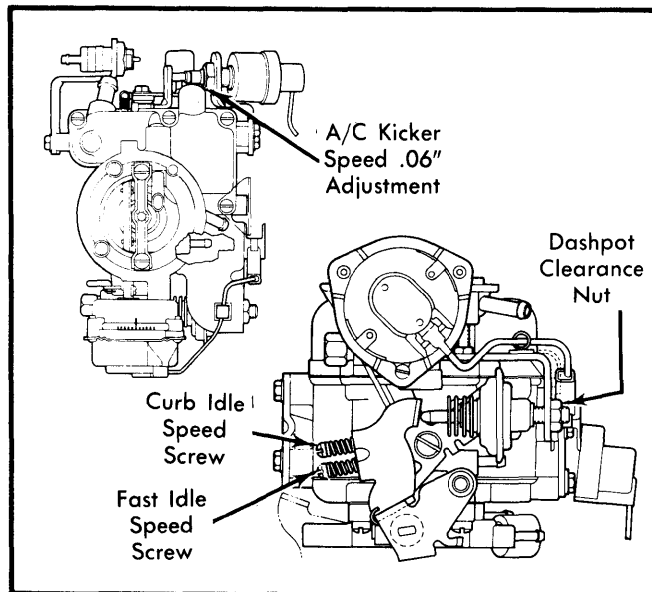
Adjusting YFA 1-Bbl. Carburetor on 4.9L Engines (Light Duty)
